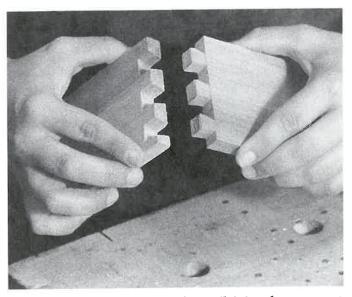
Test fitting a dovetail joint that was cut using hand tools.
